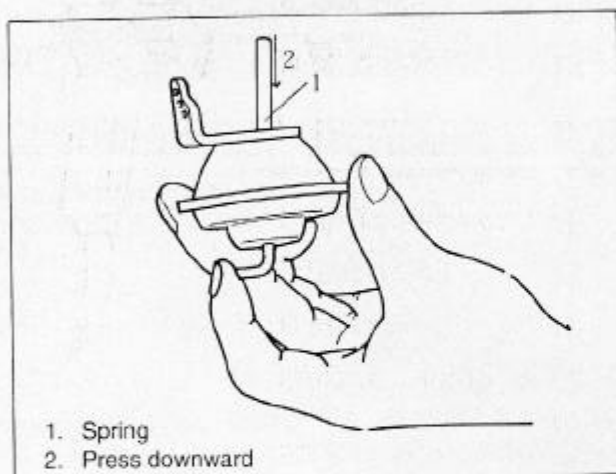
D—35 CHECKING THE 2ND DIAPHRAGM
